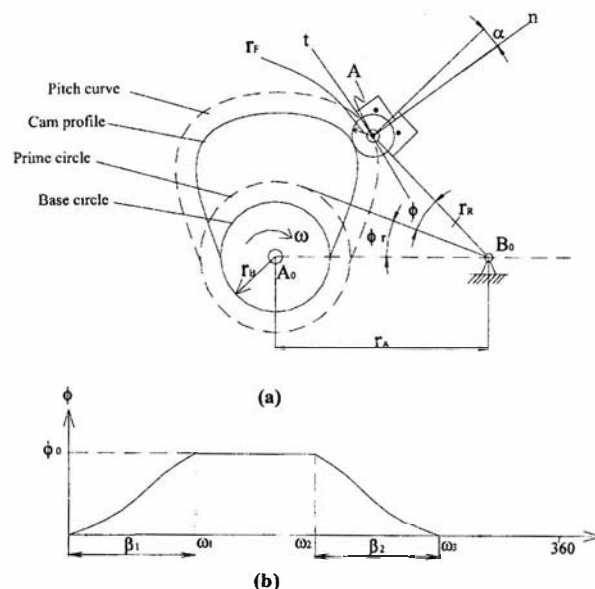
(a) Cam nomenclature and (b) A displacement diagram for oscillating roller follower type of cam [A_0 — Cam center of rotation; B_0 — Follower center of rotation; A — Follower roller center; r_F — Follower roller radius; r_b — Cam base circle radius; r_R — Follower length; r_A — Distance between A_0 and B_0 ; ϕ — Angle of cam shaft rotation; ϕ — Follower angular displacement; ϕ_r — Angular position of follower when follower roller touches cam base circle; α — Pressure angle; t — Tangential direction; n — Normal direction; ϕ_0 — Follower angular stroke; β_1 — Cam shaft rotation of rise period; β_2 — Cam shaft rotation of return period; ϕ_1 — Cam shaft angle at the end of rise period; ϕ_2 — Cam shaft angle at the start of return period; and ϕ_3 — Cam shaft angle at the end of return period]
